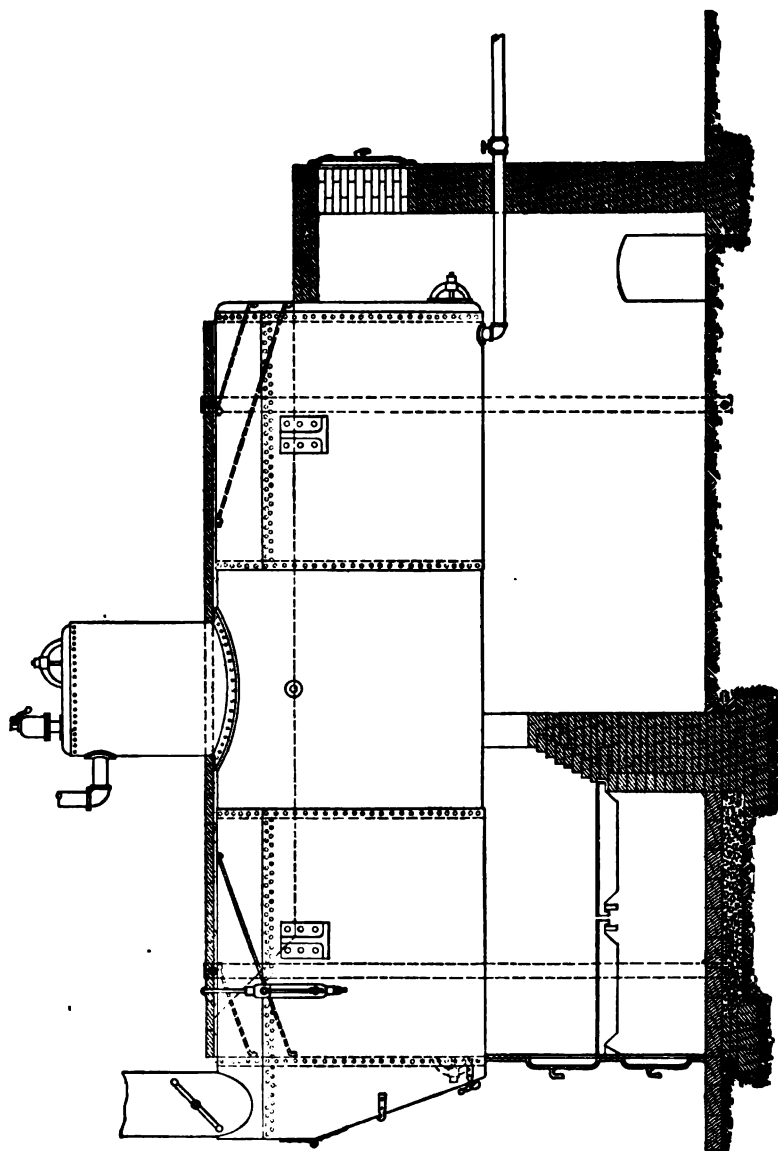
Horizontal Return-tubular Boiler, with extended or half-arch front.
